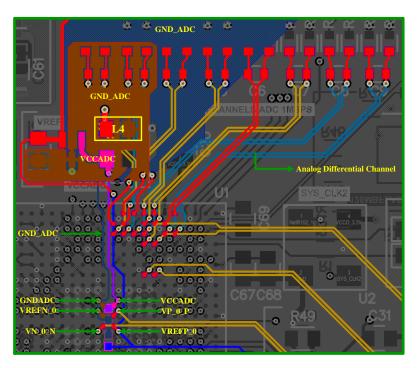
The PCB layout of XILINX ADC block (XADC).
